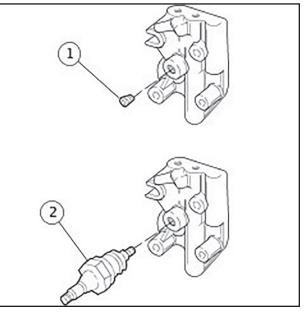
Pump Cover Oil Pressure Switch Mounting Hole
